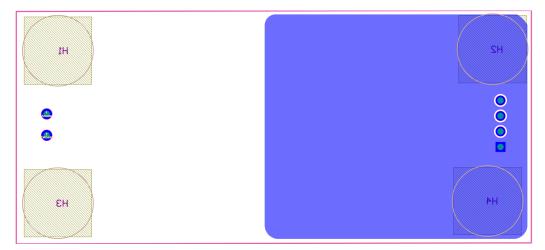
ISOM8110DFGEVM PCB Layout - Bottom
